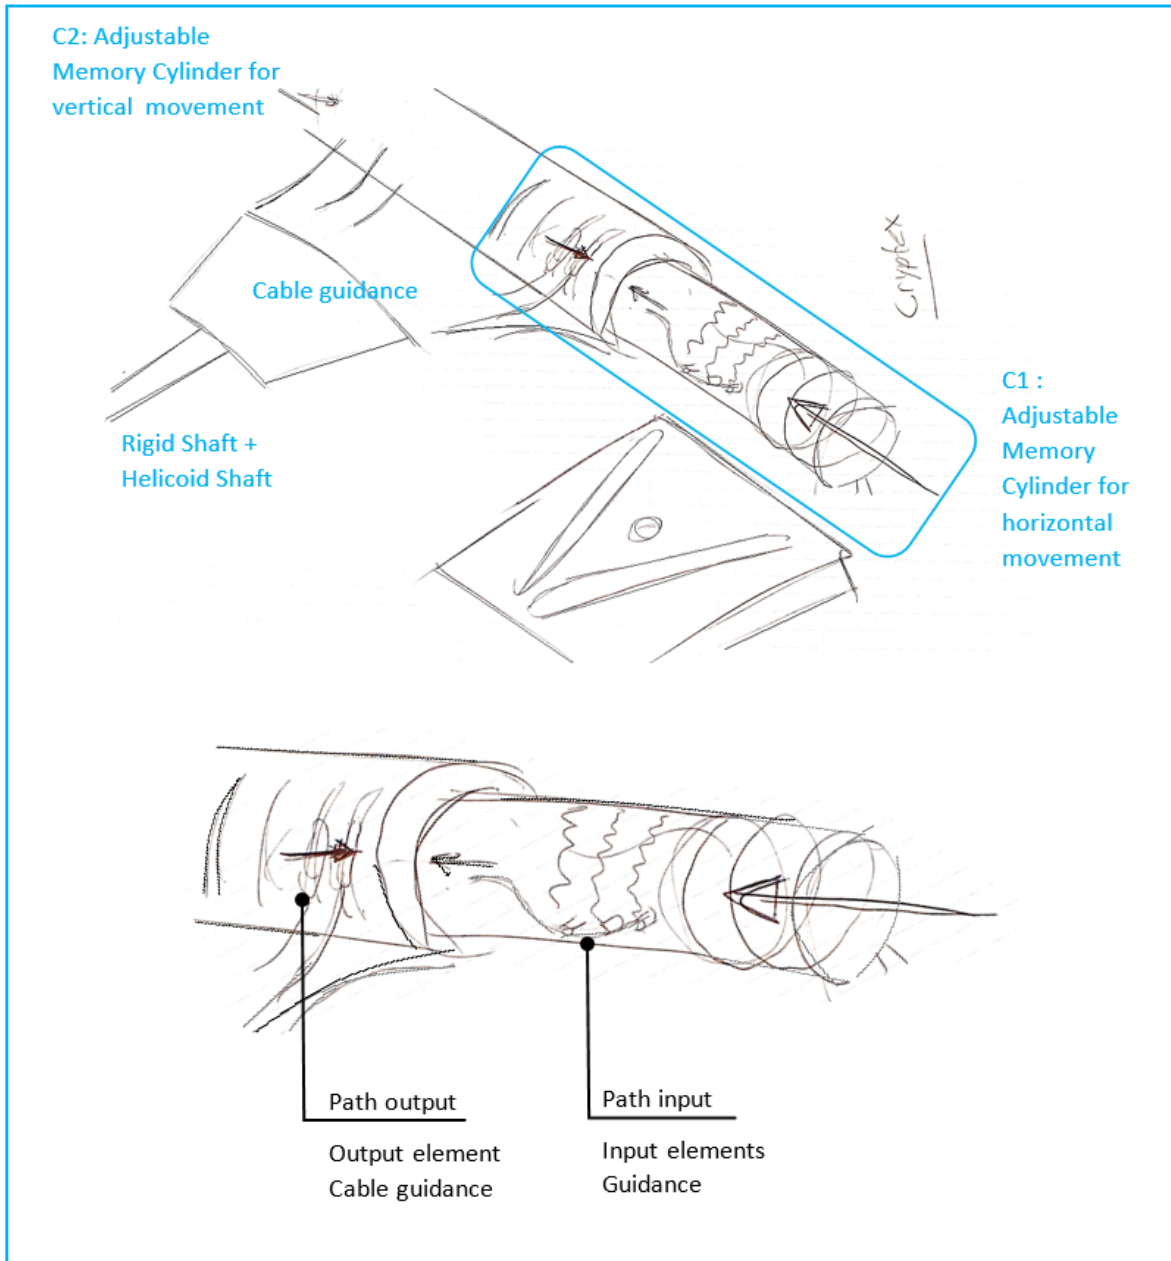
Initial design idea. Sketch for a cylindrical programmable path mechanism.
